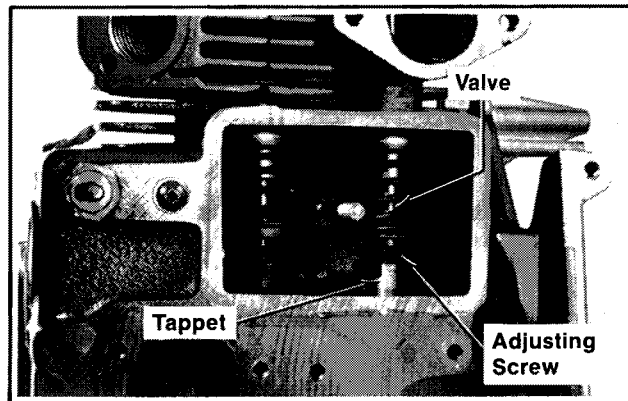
Adjusting Valve-To-Tappet Clearance—Models M10, M12, M14, and M16.
